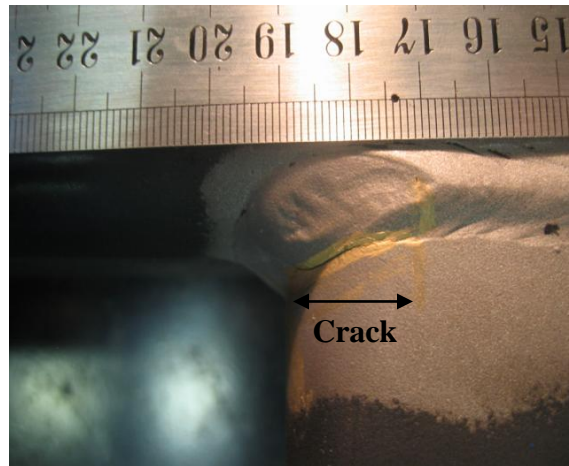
T-joint sample with fatigue crack initiated at the weld toe
